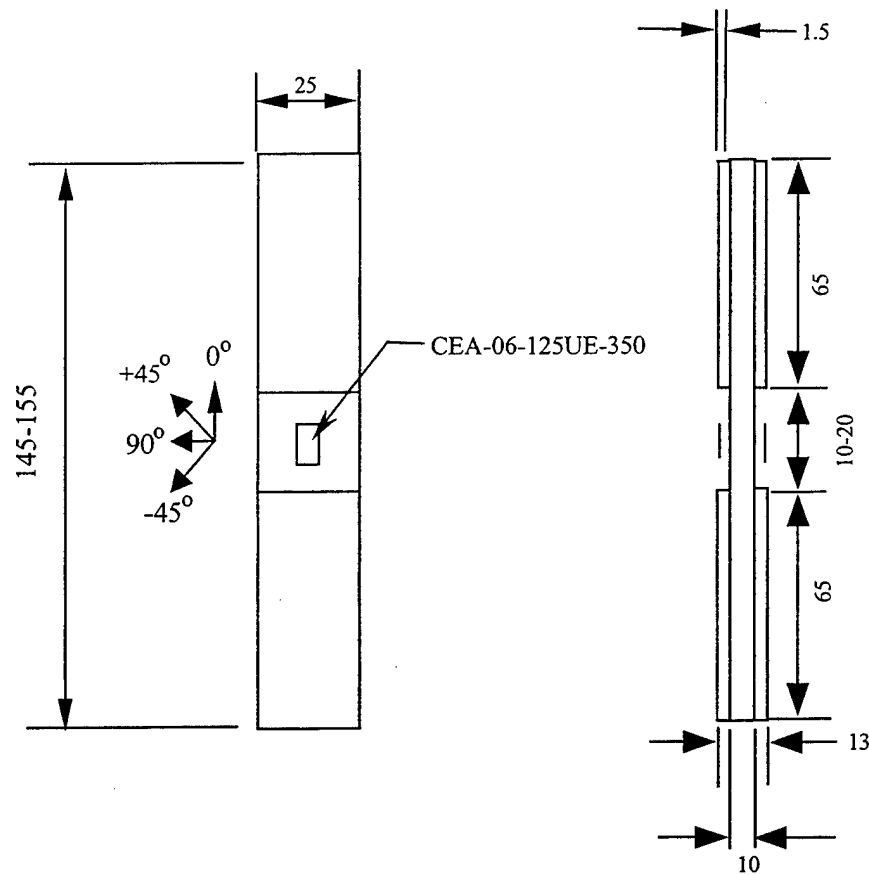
Baseline Compression Test Specimen. Dimensions Are in Millimeters.
